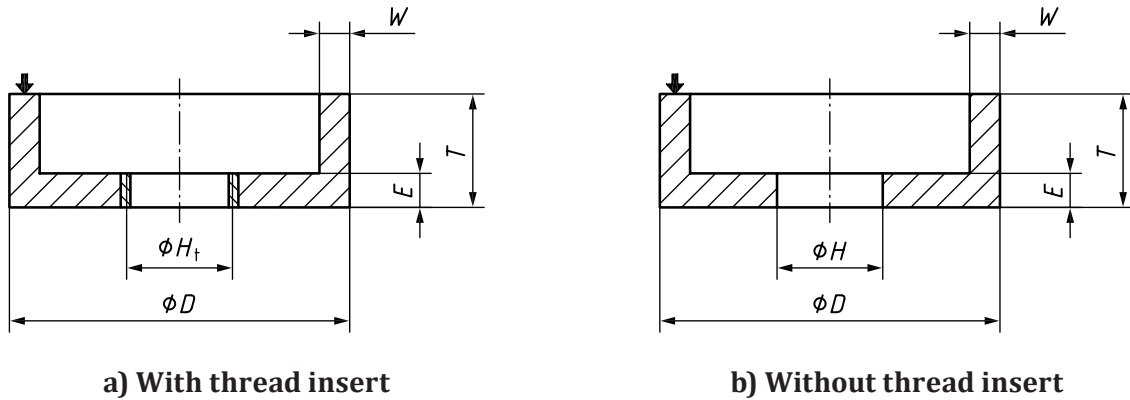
Shape type 6 without prong anchor bushing or full metal back bushing
